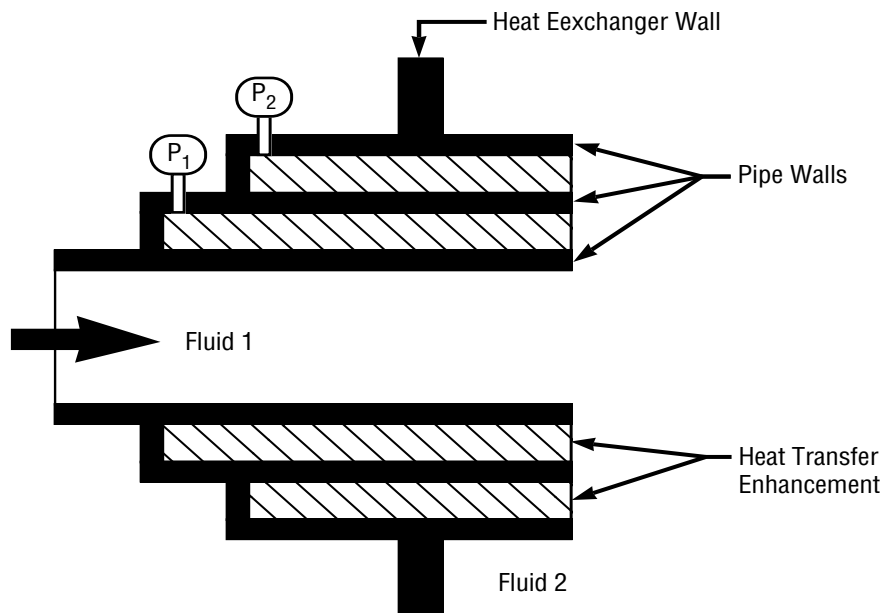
Two fault-tolerant heat exchanger tube design.
